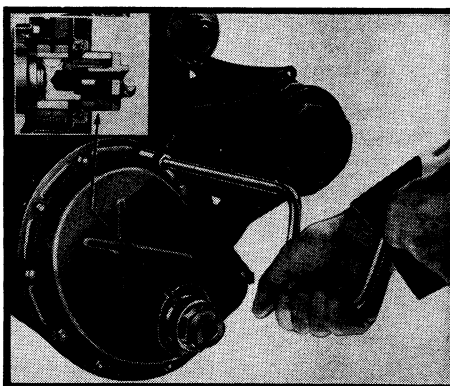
Special centering tool for timing chain cover oil seal. For 265 and smaller six-cylinder engines
